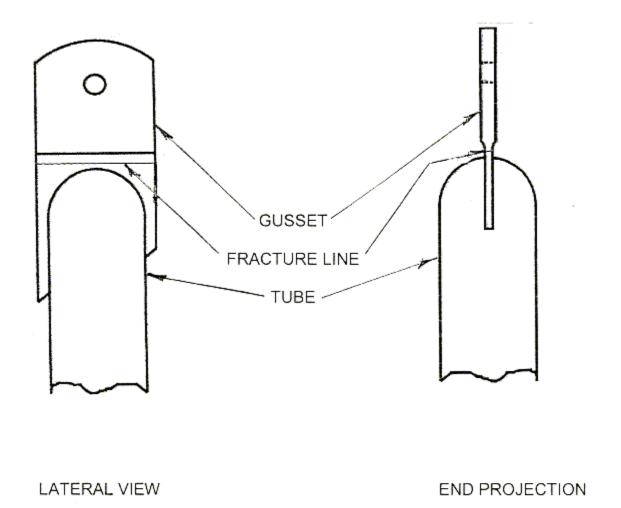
Schematic drawing of the forward end of Schweizer Model 269C-1 Aft Mast Support Strut showing the original two-step gusset and fracture line.
